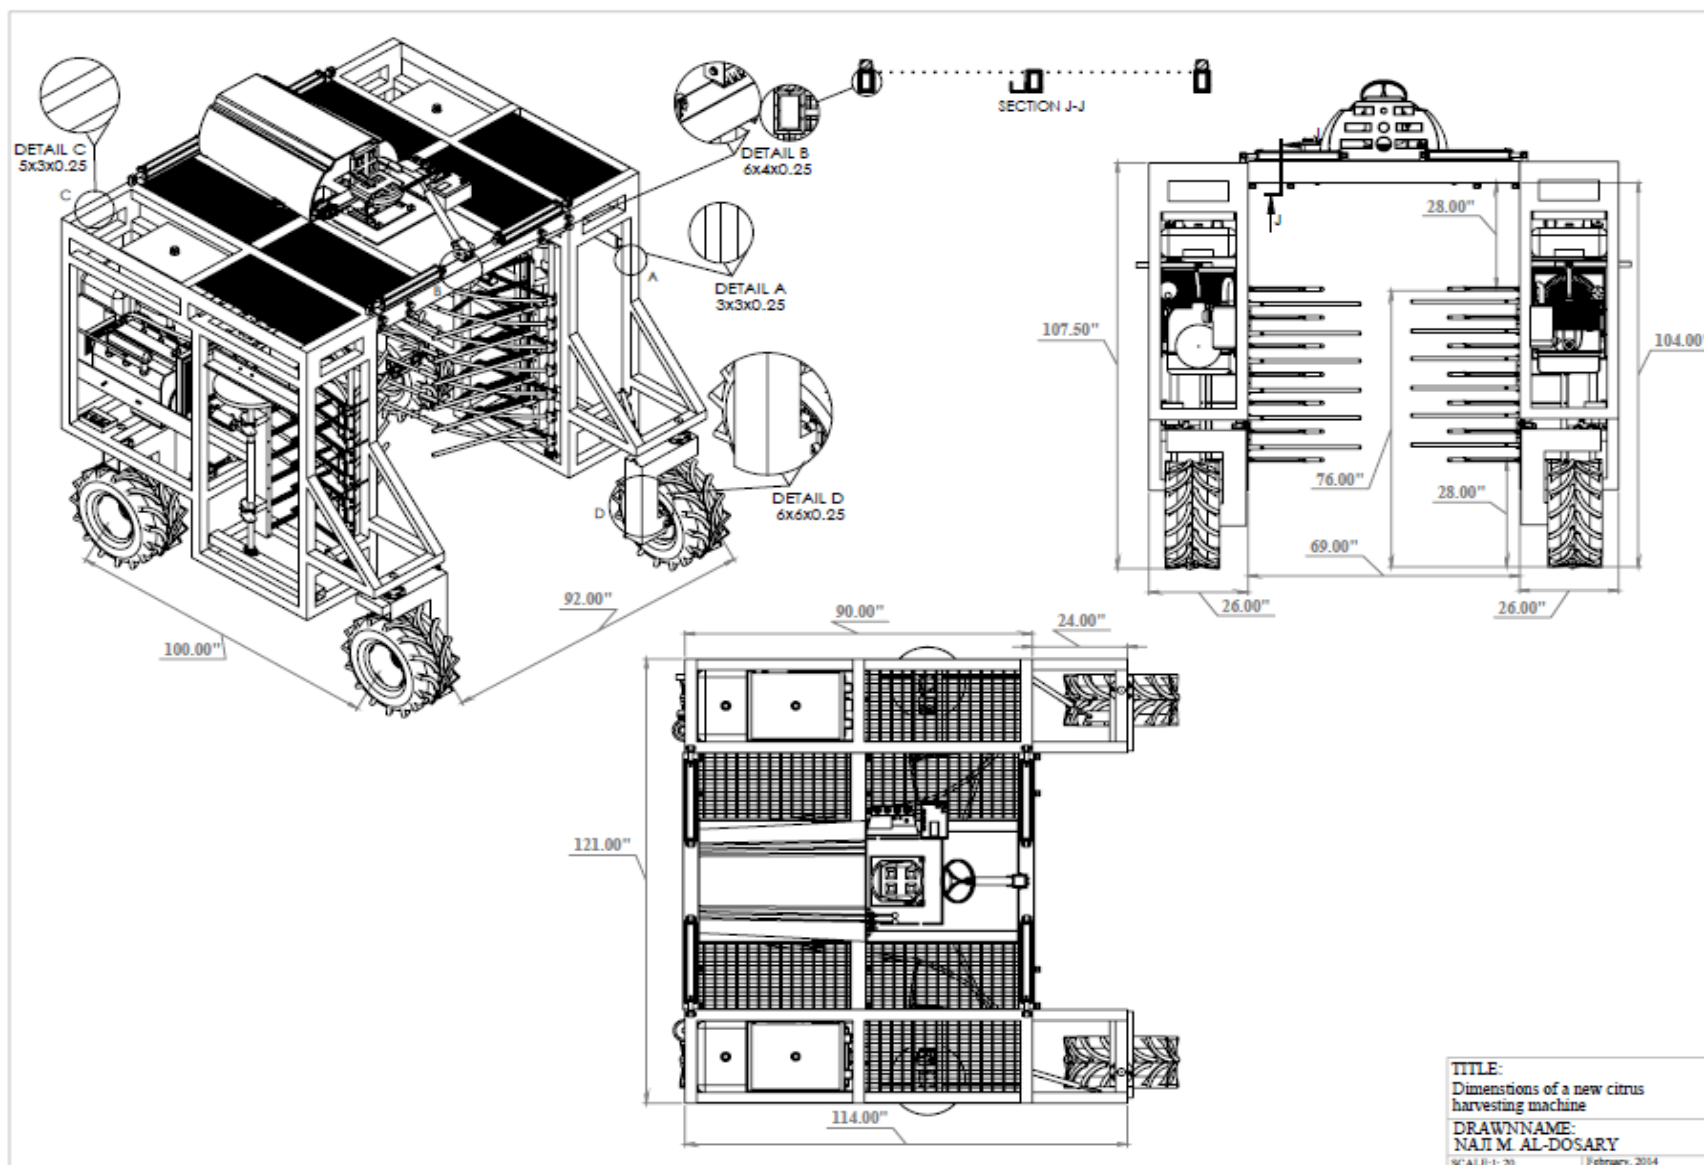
Dimensions of the new self-propelled canopy shaker machine.
